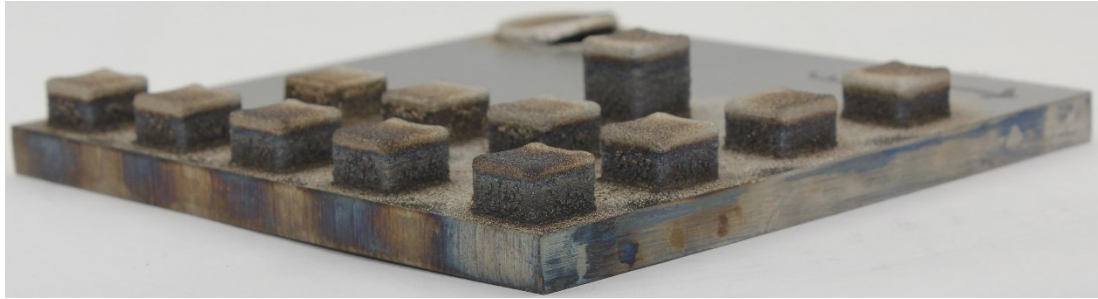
Typical examples of the DED processed D2 tool steel samples.
